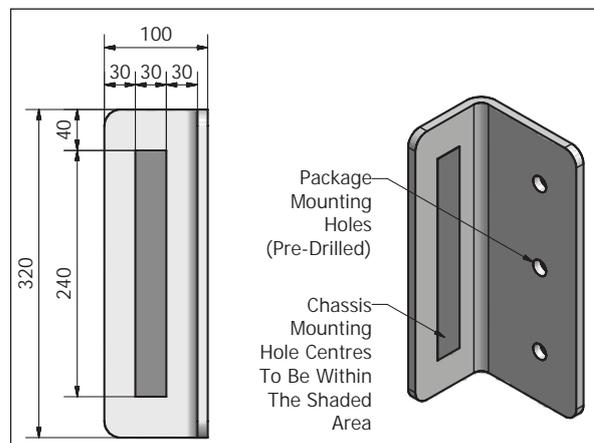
Permissible Vehicle Chassis Mounting Bracket Hole Positions.
